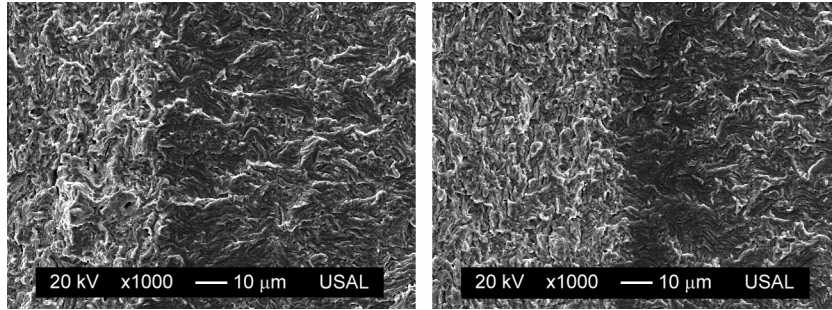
Fractography: A₅₀-type test (left) and C₅₀-type test (right). The fatigue crack advances from left to right.
